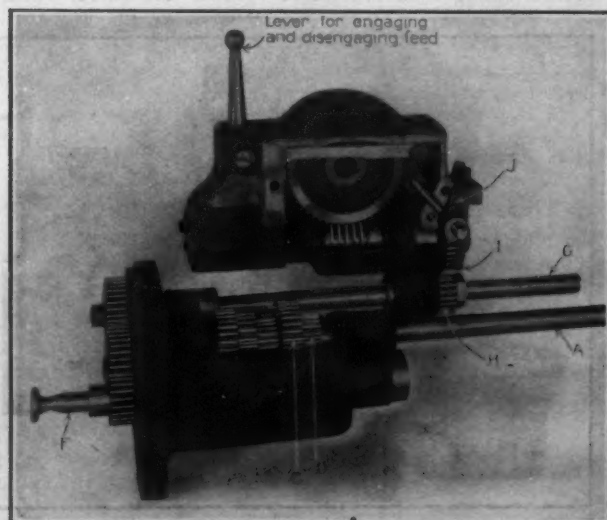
Details of the Geared Automatic Feed and Interior of the Box.
